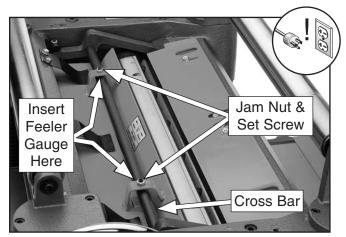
Feeler gauge locations for adjusting chip breaker height when using wood blocks.
